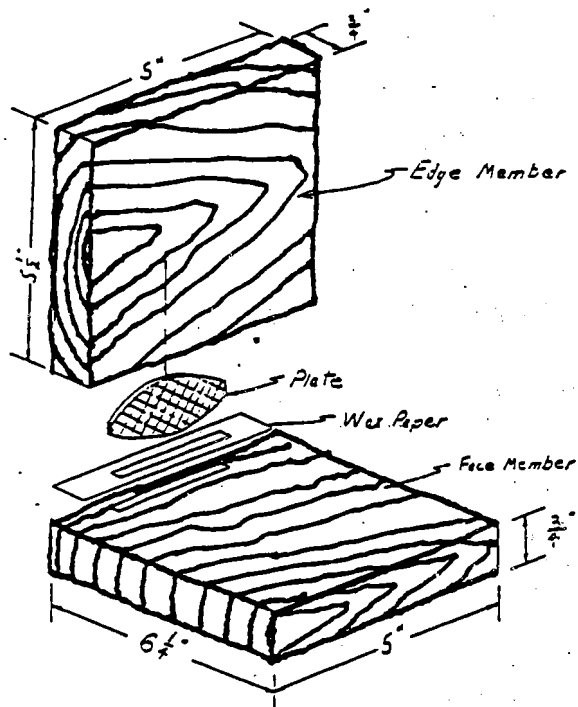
Exploded view of the edge-grain corner plate-joint specimen. Dowel-joints were made in the same fashion, with a single birch dowel substituted for the plate.
